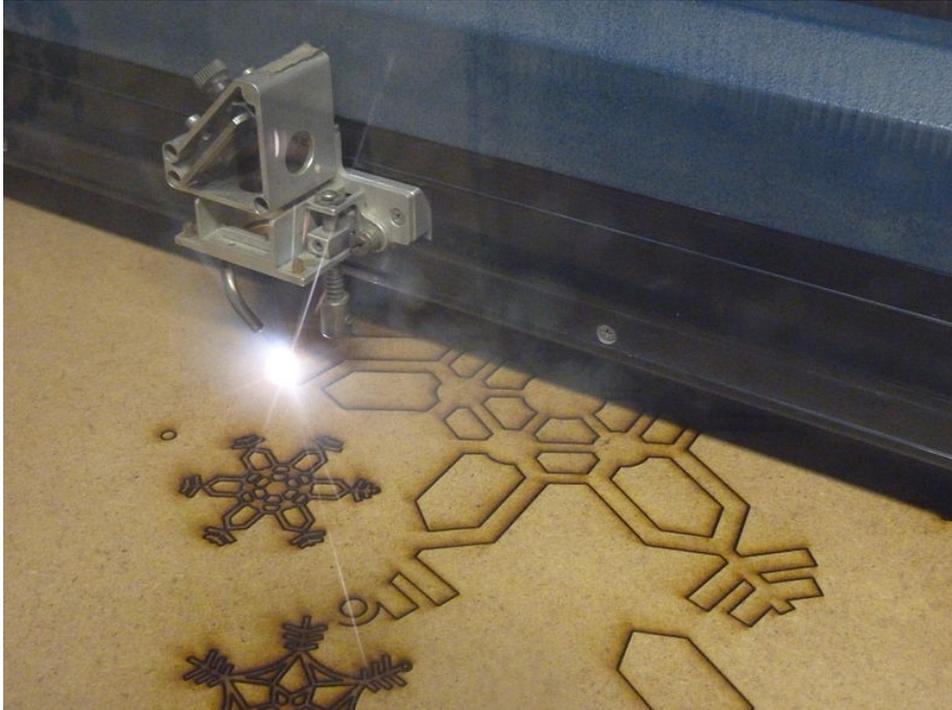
A laser cutter machine, cutting a snowflake pattern into MDF [7].
